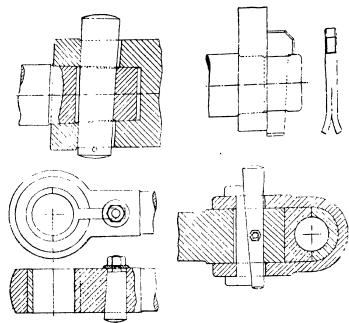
Examples of cotters used as fastening and adjusting agents
